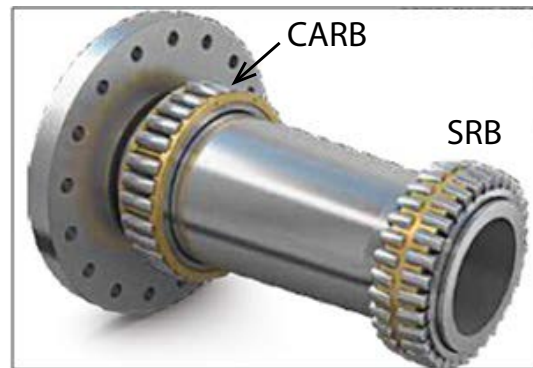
Main shaft and main bearing assembly [(Svenska Kullagerfabriken AB (SKF), 2013)]
